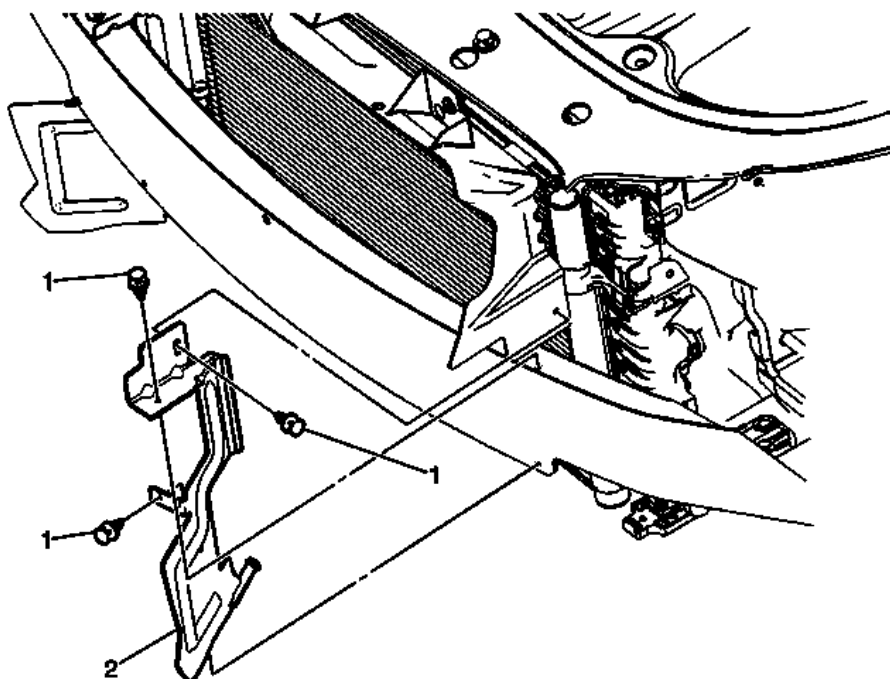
Radiator Air Side Baffle & Deflector (Left)
